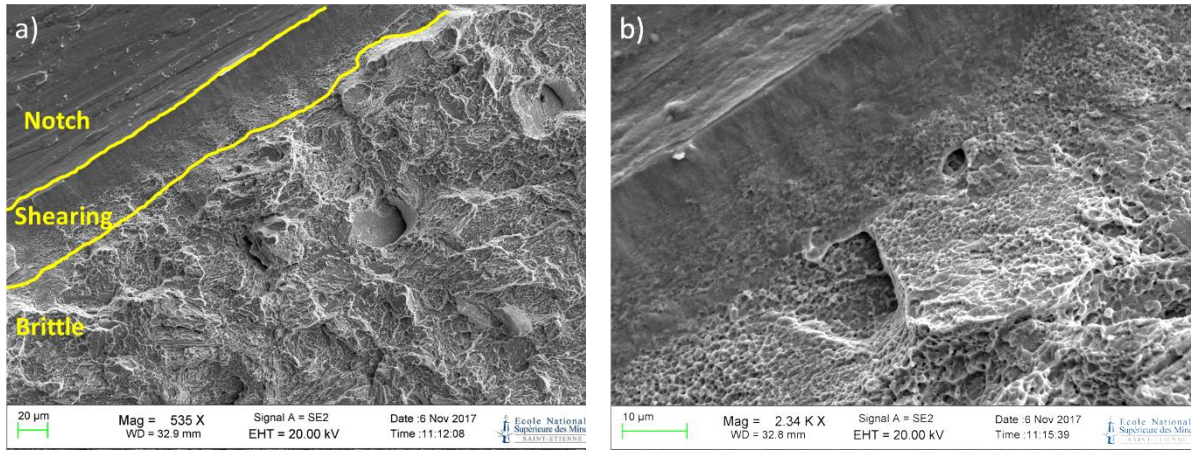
Fracture surface of the hydrogen-uncharged sample, broken after Charpy test.
